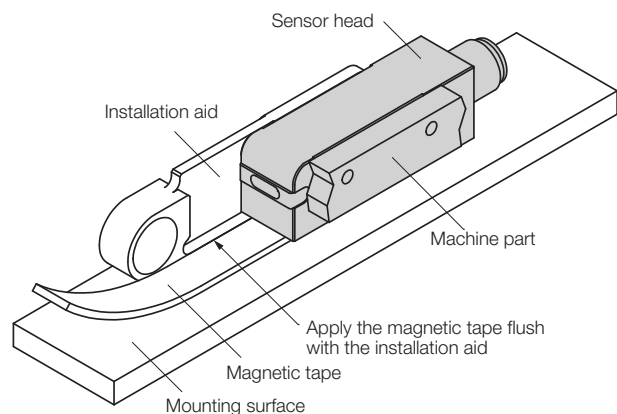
Fastening installation aid BAM TO-ML-006-S1G (order code BAM0256) (left- or right-sided fastening is possible, figure shows right-sided fastening)
